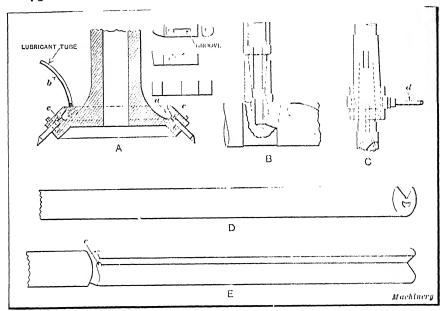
Methods of delivering Coolant to Oil-tube Tools-Drill and Reamer for Deep Holes
